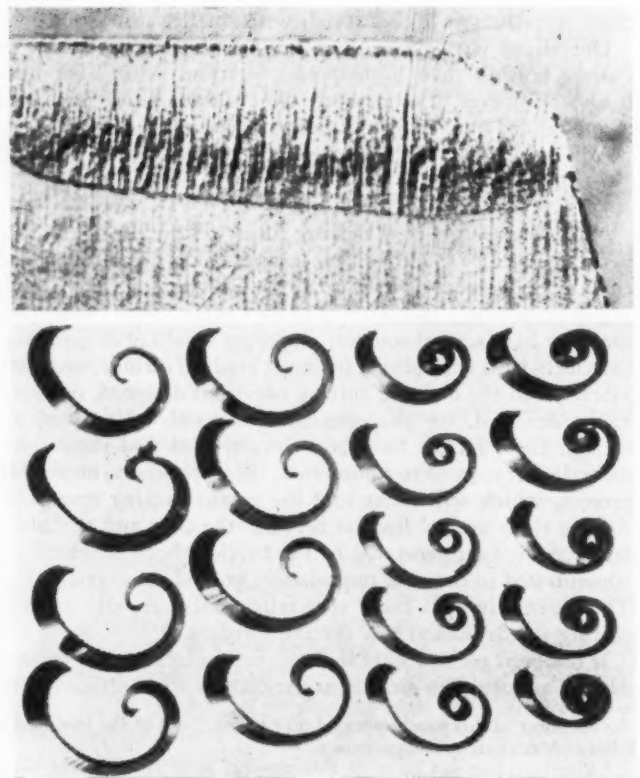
CUTTING EDGE AND CHIPS FORMED AT 1385 FPM
